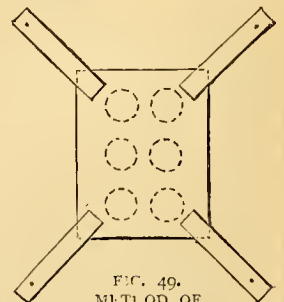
METHOD OF FORMING VALVE. Half full size.
